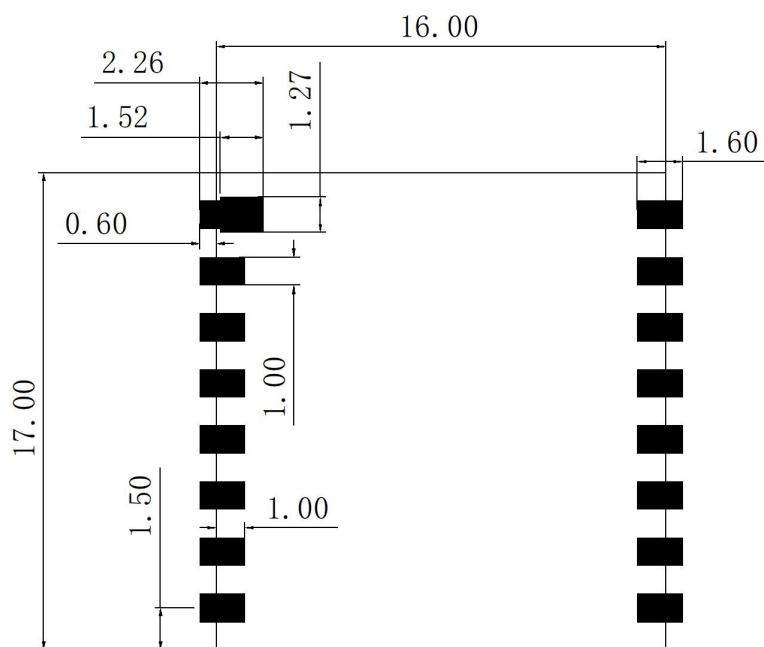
Recommended PCB Footprint Dimensions (Unit: mm)
